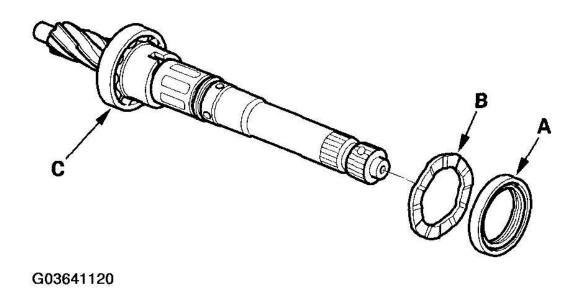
Removing Valve Oil Seal And Wave Washer From Pinion Shaft Courtesy of AMERICAN HONDA MOTOR CO., INC.
